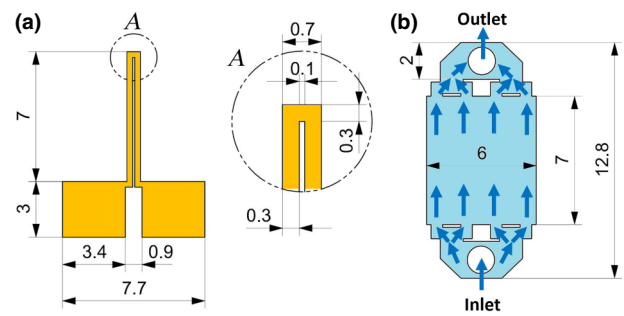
Details of (a) resistor and (b) manifold geometry.
